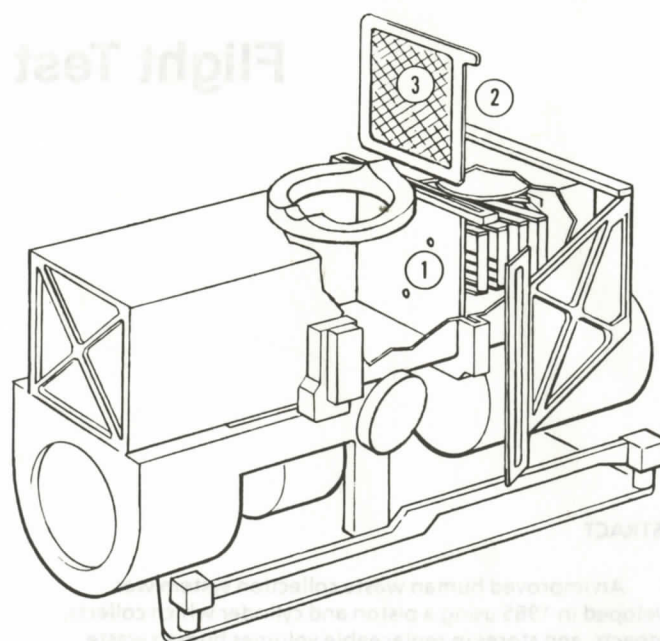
Cutaway drawing viewed from storage end showing 1 - bare piston face, 2 - replaceable pad to cover piston carried by, 3 - a rigid frame which is slipped into a sealed holder in front of the piston.
